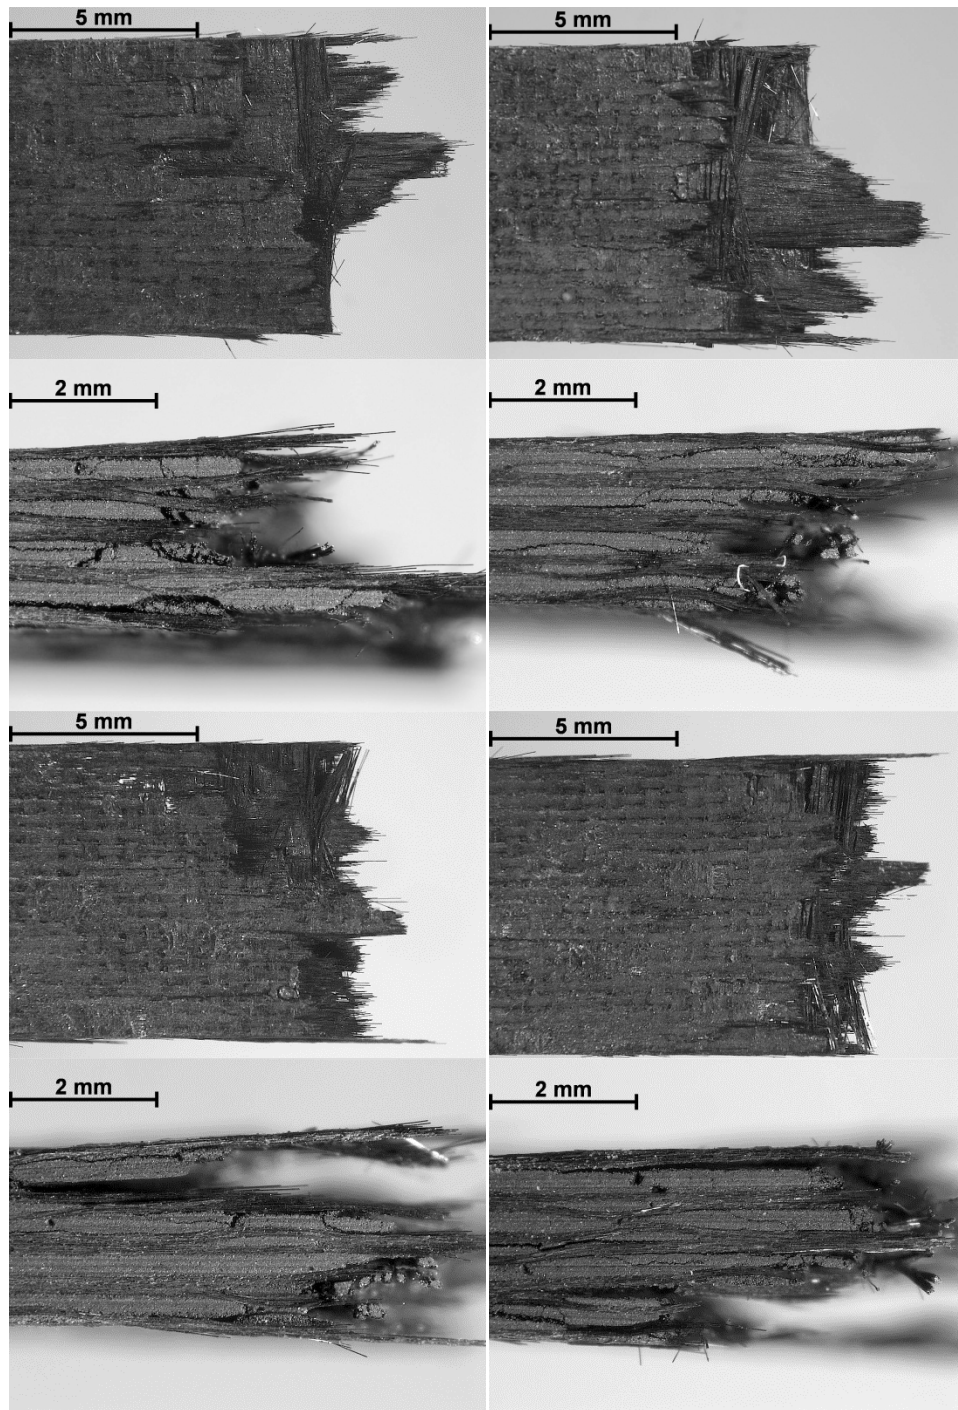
Fracture surfaces obtained in tensile test of virgin Hi-Nicalon™/SiNC specimen (Plate 11107, Specimen 3)
